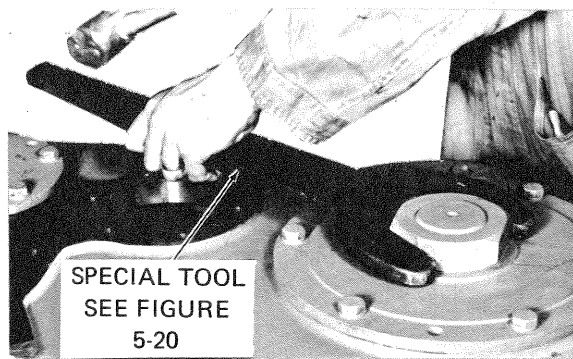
DRUM SHAFT AND DRUM ARRANGEMENT
